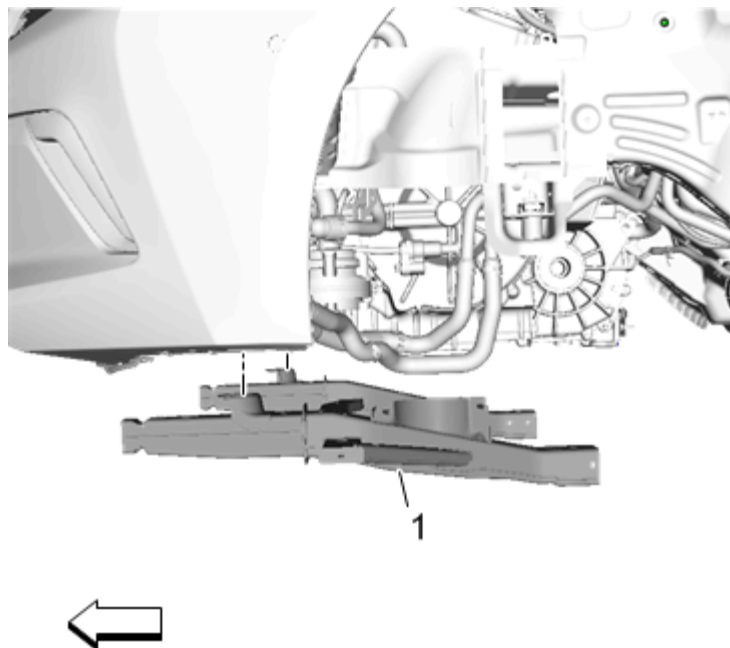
Drivetrain And Front Suspension Cross Member Extension
